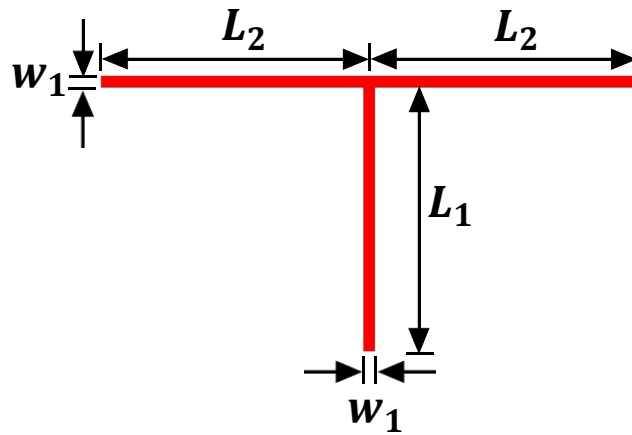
Schematic of the T-shaped mechanical suspension spring.
